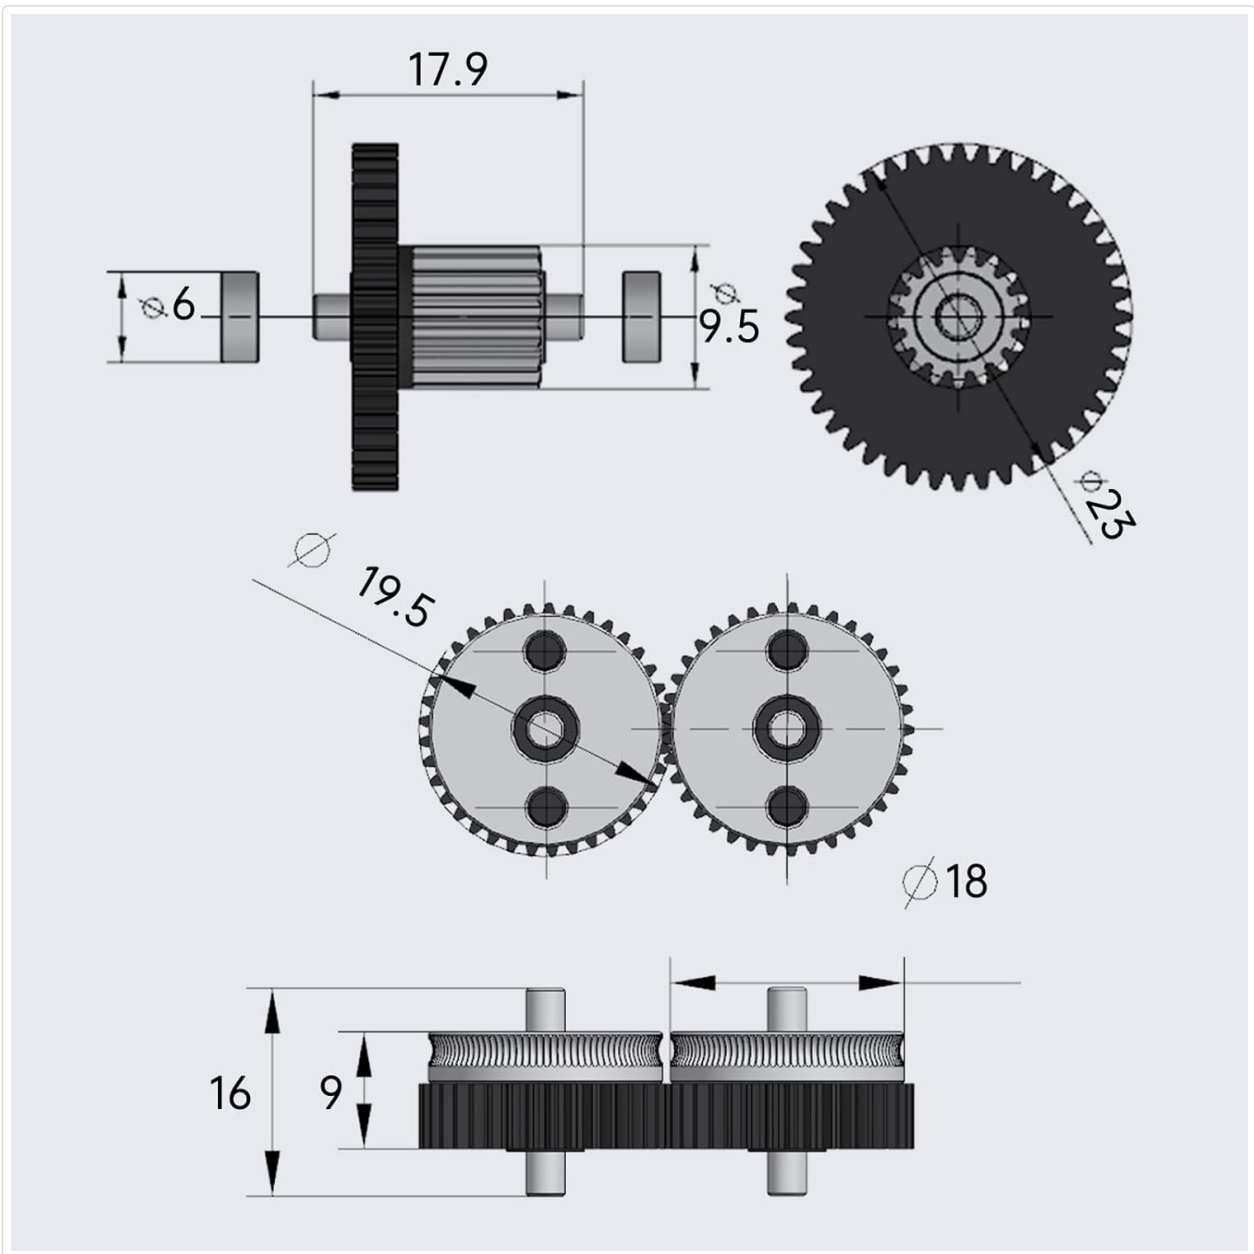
Detailed dimensional drawing of the internal gears, including diameters and shaft sizes, useful for replacement or custom integration.
